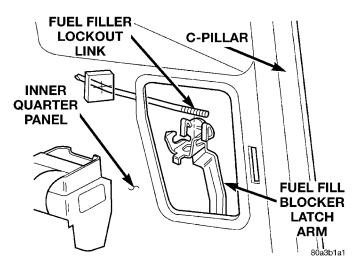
Fuel Filler Lockout Link at Latch Arm
